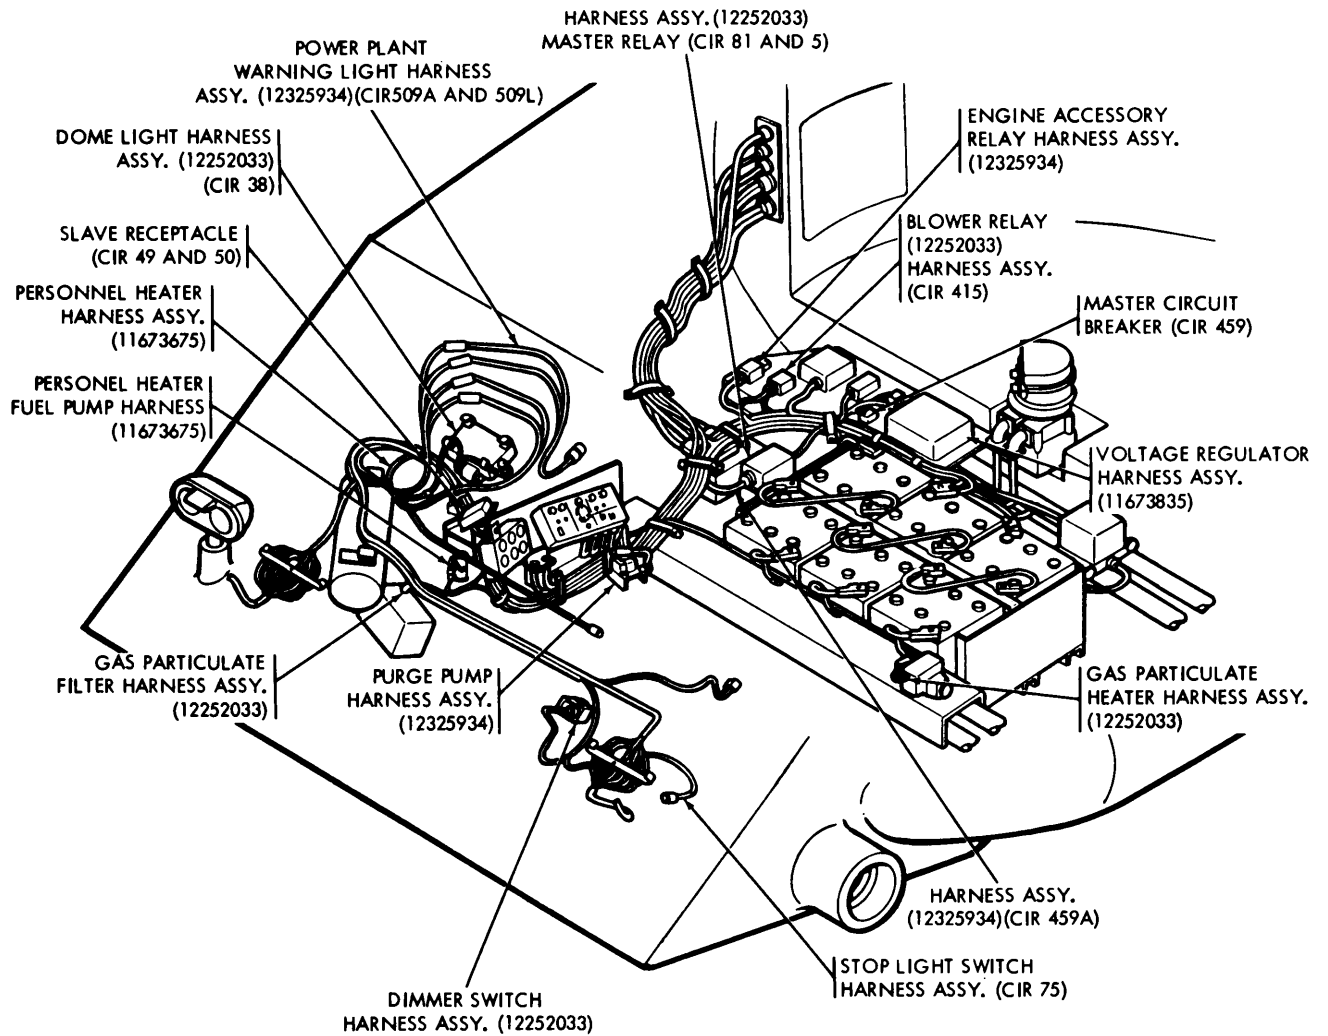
Crew compartment wiring harness and components - locational view (sheet 1 of 2).
